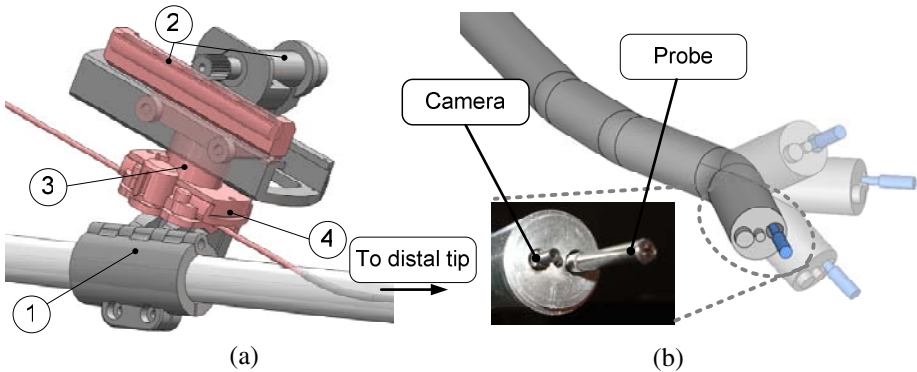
(a) Schematic illustrating the force adaptive linear servoing mechanism. Moving parts are marked in red. It consists of four key components: a clamp (1) which attaches to the robot shaft, a Maxon RE10 Brushed DC motor driving a rack and pinion linear slider (2), a Nano17 F/T sensor (3) and a housing to clamp and thus translate the imaging probe (4) (b) A CAD schematic illustrating the concept of the robotic scanning device using controlled actuation of the distal tip. The 1.8mm Medigus Camera and fluorescent imaging probe are also marked.
